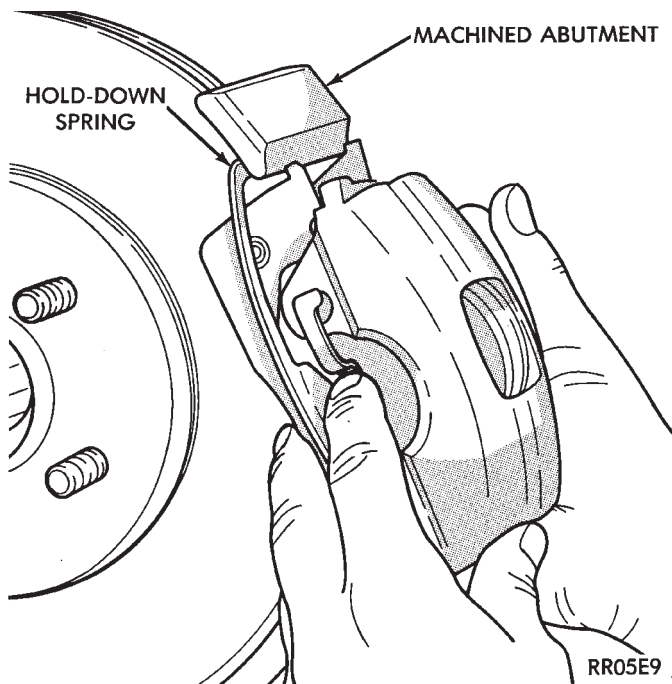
Installing Outboard Shoe Assembly onto Caliper
